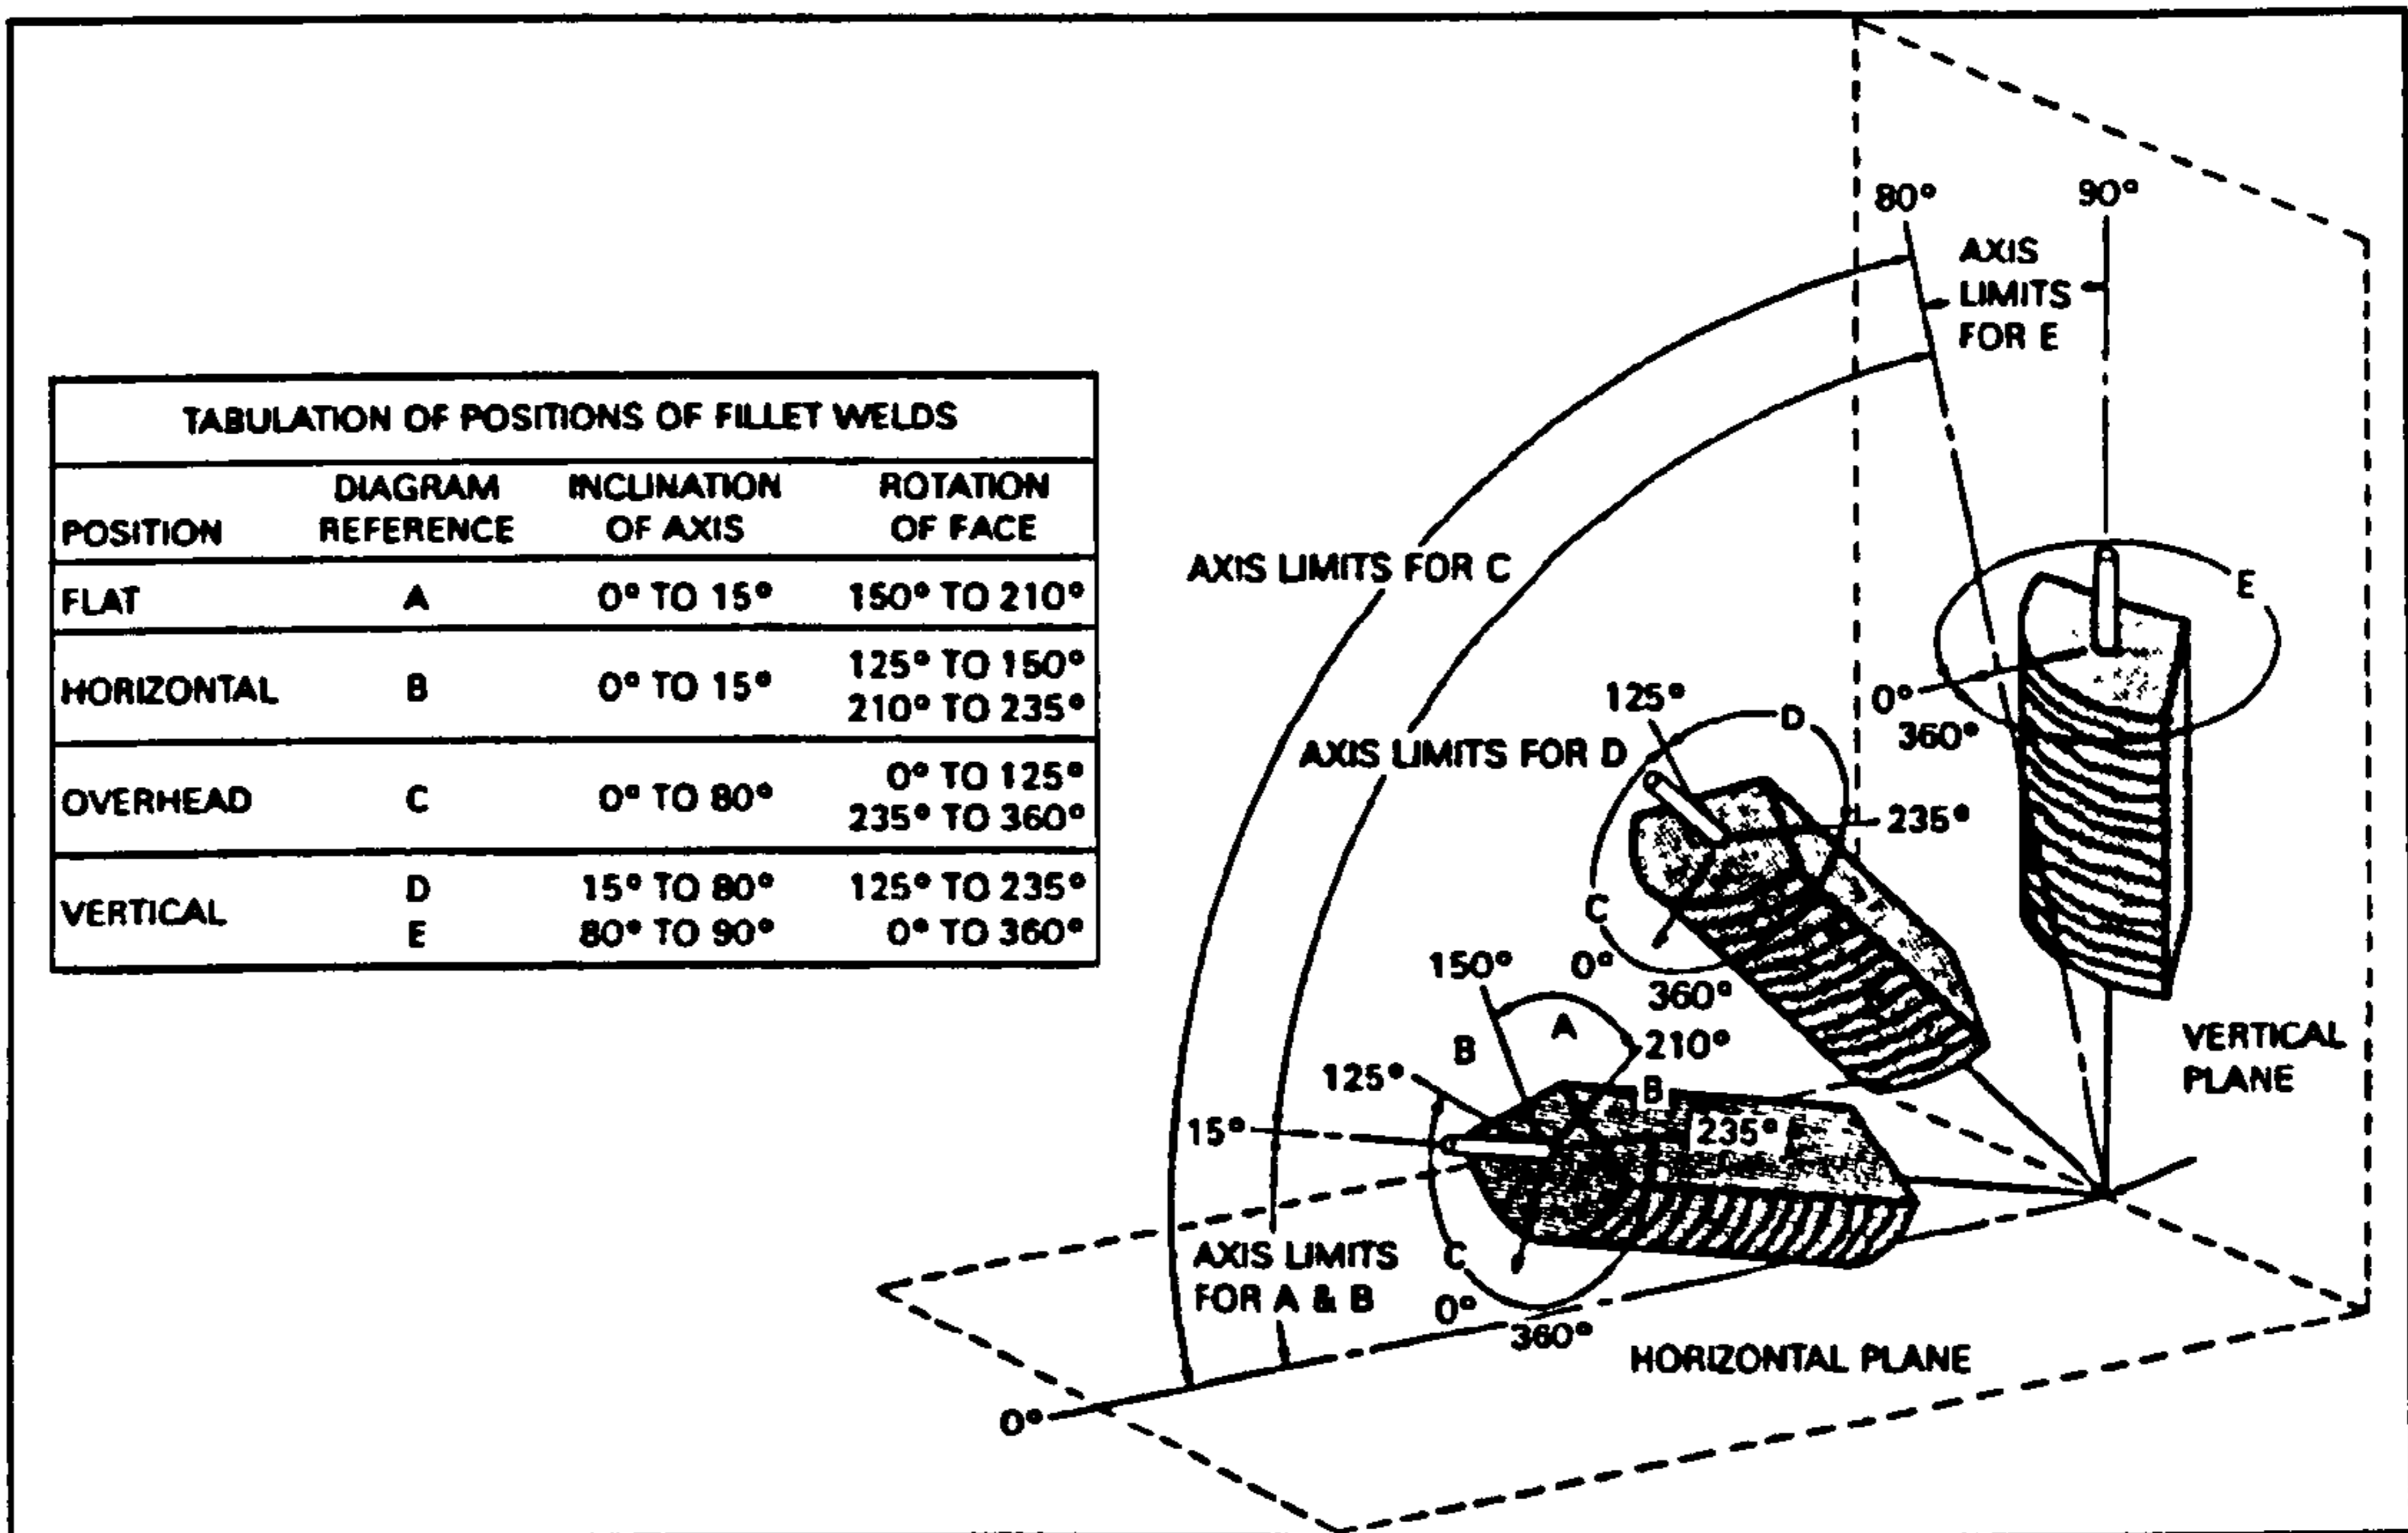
Limiting angles for defining positions of fillet welds [ref. 191]
